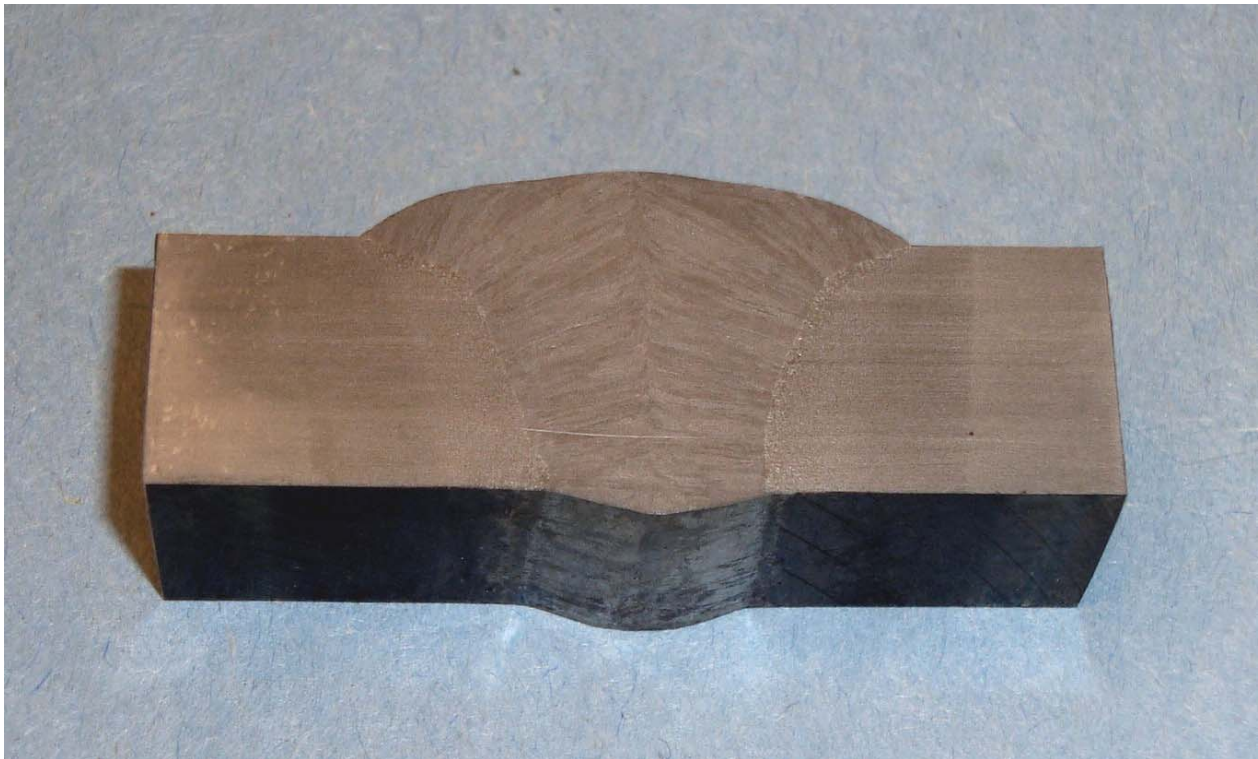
Sample Macro, ½" OS Weld Procedure
